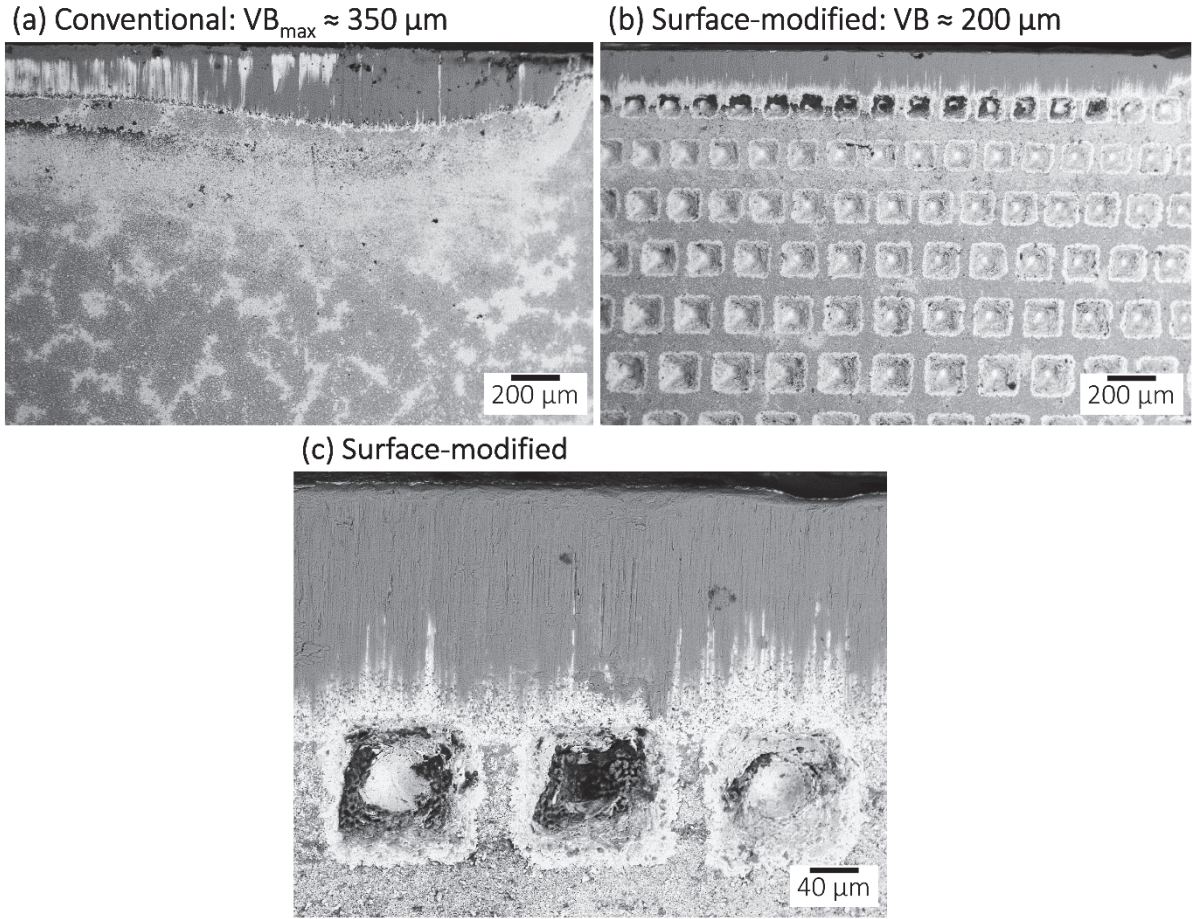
BSE micrographs of the obtained flank wear after high-pressure jet assisted machining for a spiral cutting length of 565 m: (a) conventional tool; (b) and (c) surface modified tool. Employed cutting parameters were $v_c = 60 \text{ m/min}$, $f = 0.1 \text{ mm/rev}$, $a_p = 1 \text{ mm}$ and coolant supply pressures were 16 MPa to rake face and 8 MPa to flank face, respectively.
